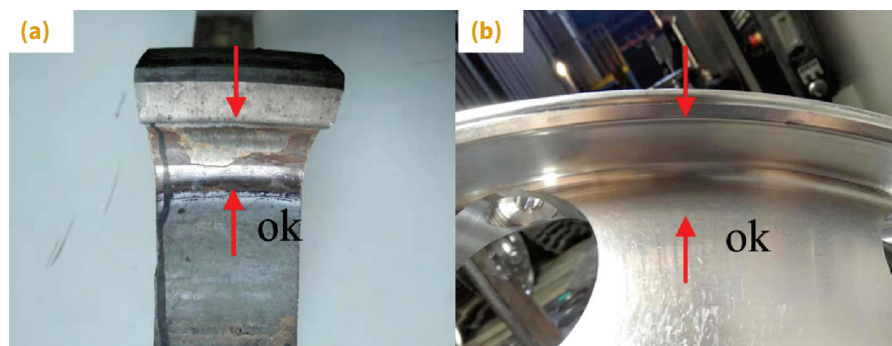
Actual processing effect: (a) blank; and (b) finished product after processing.
